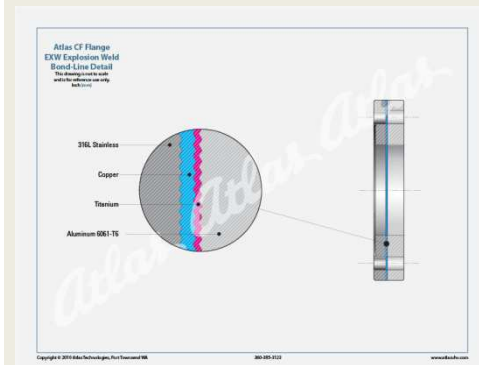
Cross-section of Atlas CF Flange showing stainless flange face bonded to an aluminum flange body.
